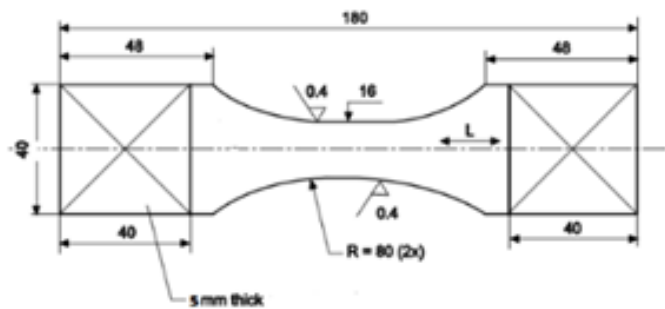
Fatigue coupon dimensions use for fatigue crack initiation tests with low K_t [25].
